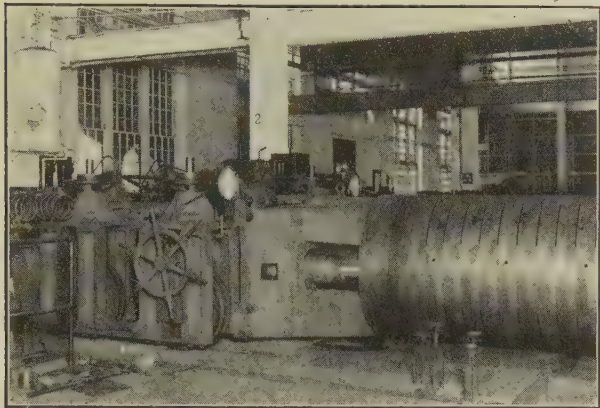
HYDRAULIC BOLT PULLER FOR TIGHTENING THROUGH BOLTS IN PLATE TYPE TURBO ROTOR, WHICH INSURES THE CORRECT TENSION ON EACH BOLT
